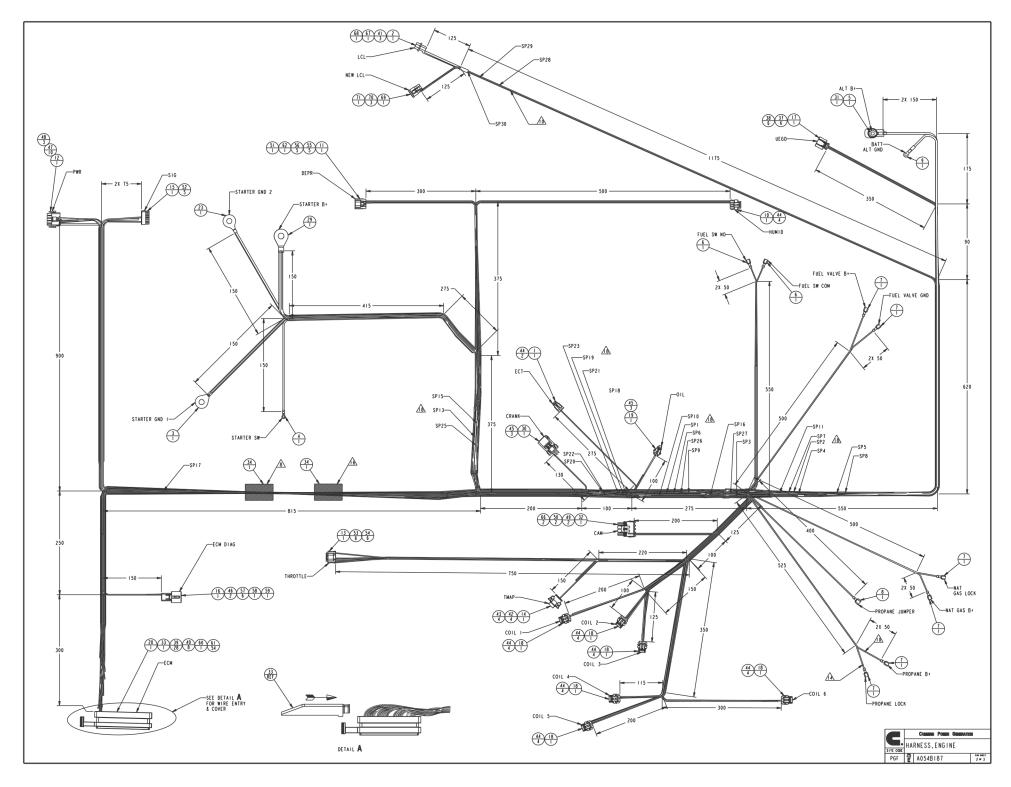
HARNESS, GENERATOR SET ELECTRICAL (SHEET 2 OF 3)
